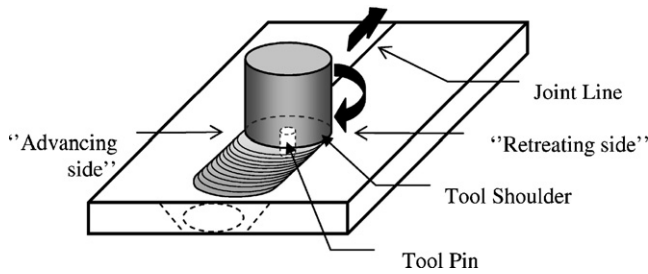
Principle of the friction stir welding process (from Ref. [19]).
